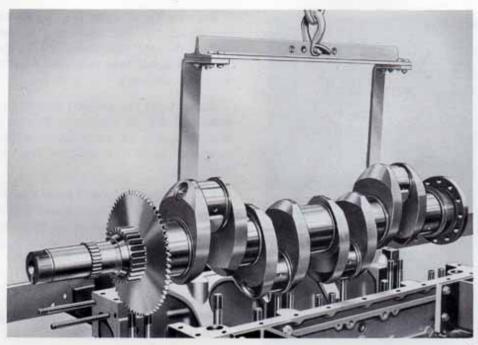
| Lifting the crankshaft (4-cylinder engine)
